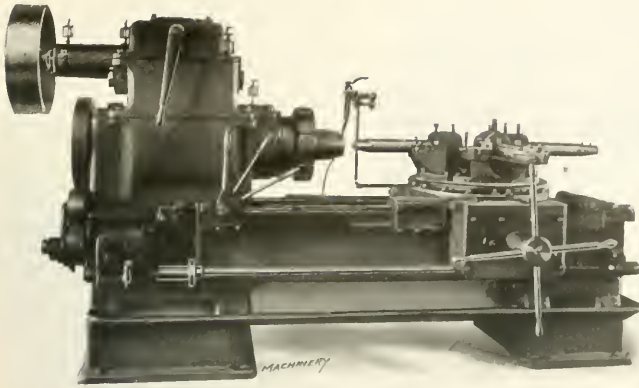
Dodge Turret Lathe for machining Shells up to 6 Inches in Diameter
